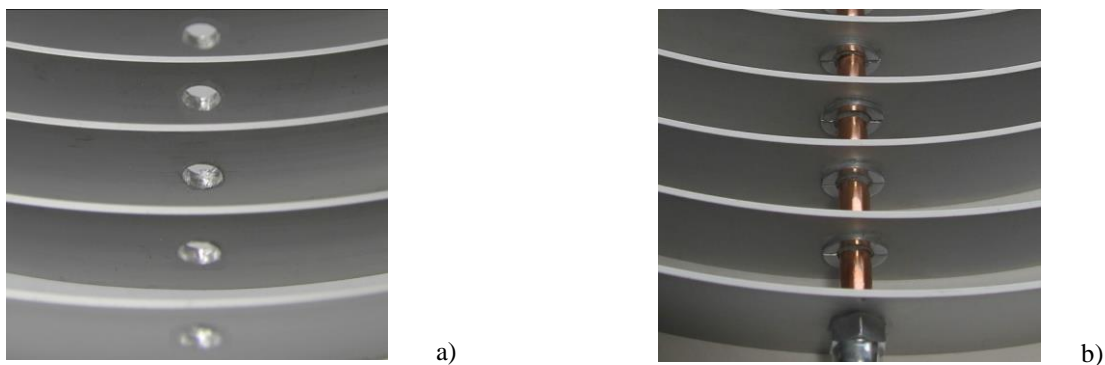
Heat exchange elements of the cooling system with manufactured holes (a) and with using heat-conducting glue and aluminum washers (b).
